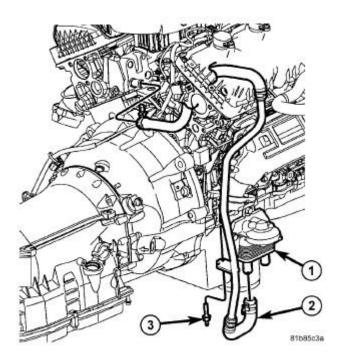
Oil Cooler, Coolant Hose & Fastener Courtesy of CHRYSLER LLC
